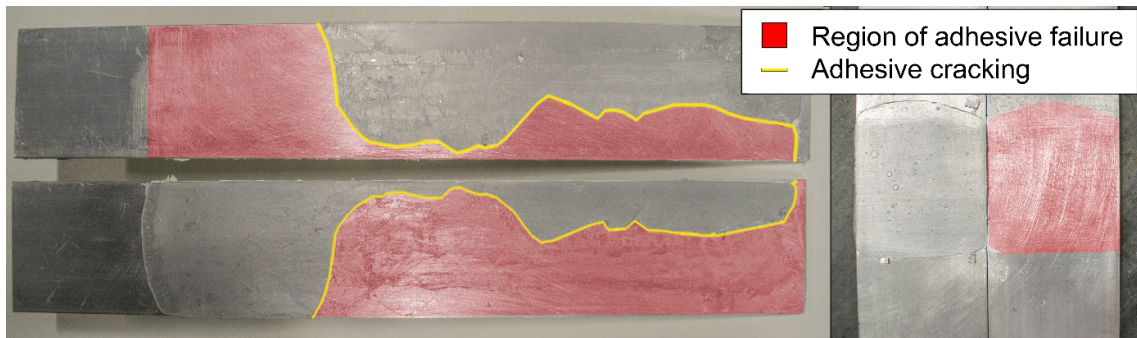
Example of failure mechanisms observed. Left: DCB specimen showing adhesive failure and cracking of the adhesive layer. Right: Lap-shear specimen showing only adhesive failure.
